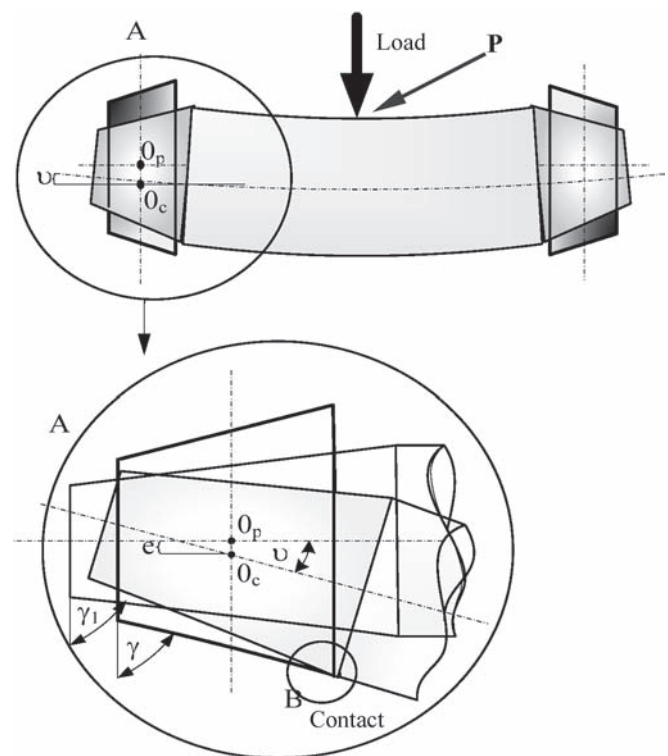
Geometrical model of conical slide bearing, ν [0°] – skewing angle, O_p , O_c – centres of sleeve and pin, respectively, e [m] – bearing eccentricity
